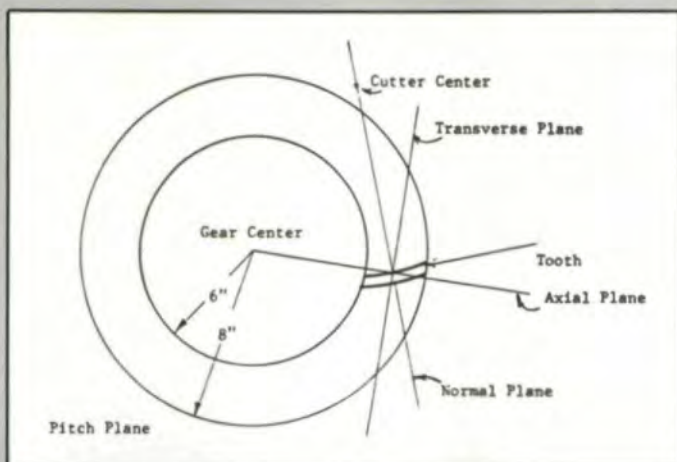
Spiral Bevel Crown Gear and Identifying Planes
